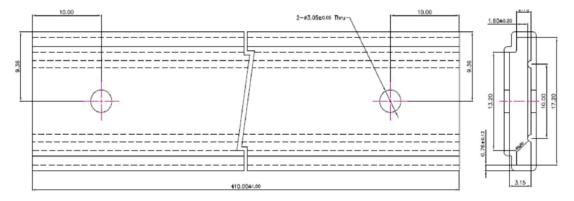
Tube dimensions for L2C5-xxxx1202x090x, L2C5-xxxx1203x090x and L2C5-xxxx1204x090x.
